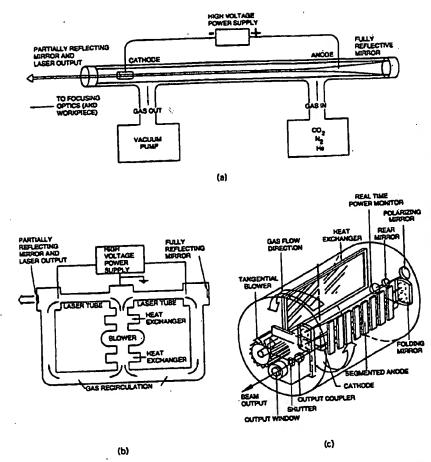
Schematic of (a) slow axial flow, (b) high axial flow, and (c) transverse flow lasers (From Welding Handbook, Vol. 2: Welding Processes. 8th ed., edited by R. L. O'Brien, published in 1991 by and used with permission of the American Welding Society, Miami, FL.)
